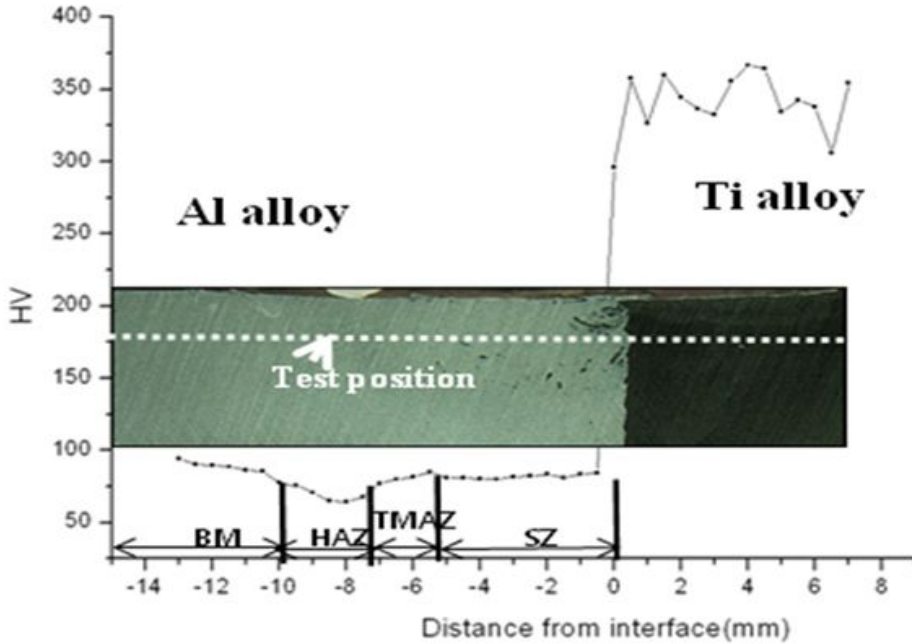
Hardness profile for the welding cross-section
